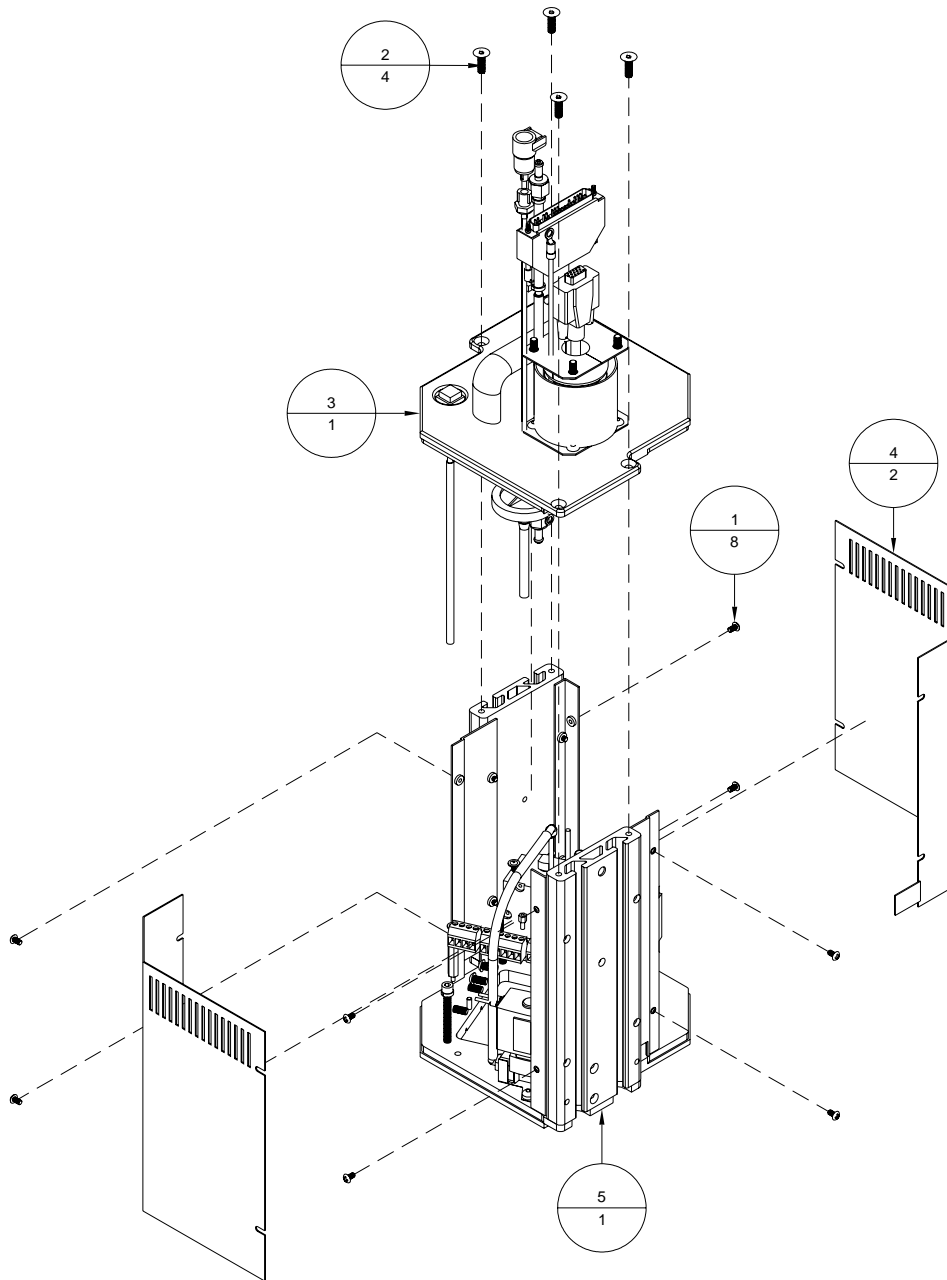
Printhead, Cezanne 2250 (BK792-C)
